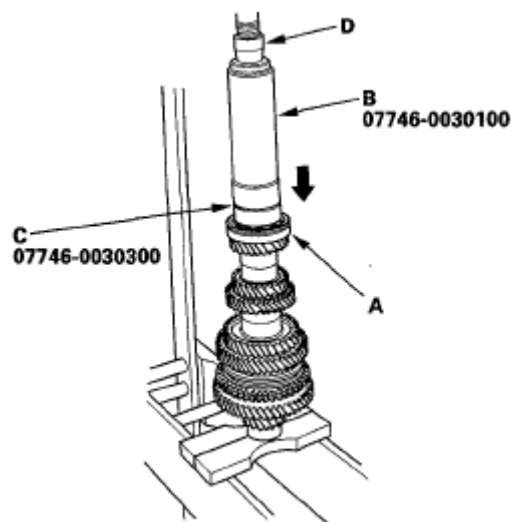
Identifying Ball Bearing, I.D. Driver, I.D. Attachment And Press
